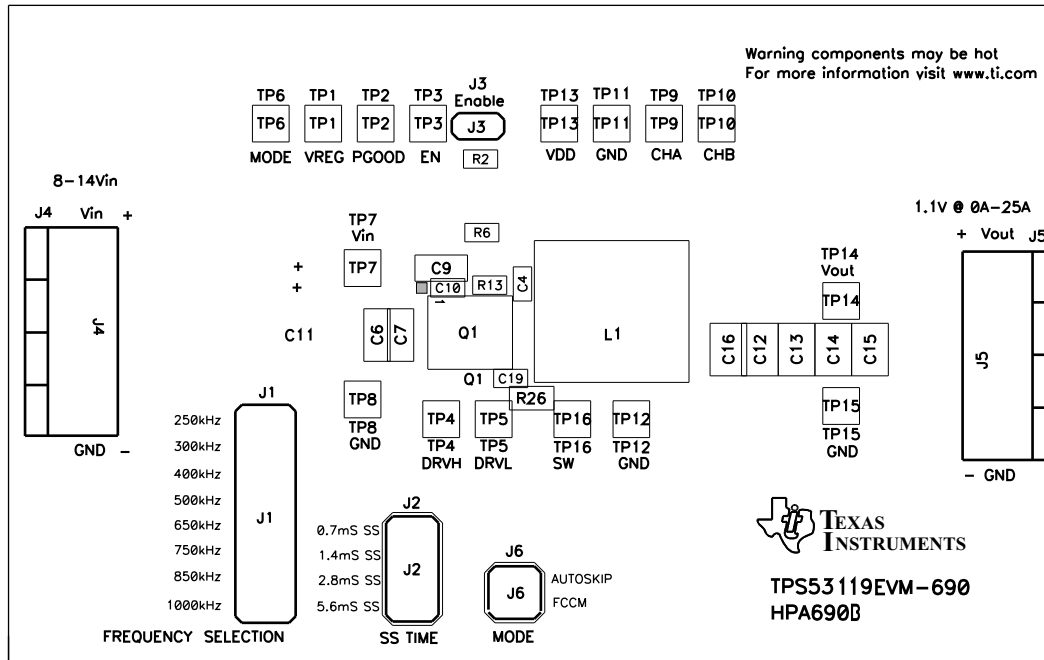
TPS53119EVM-690 Top Layer Assembly Drawing, Top View
